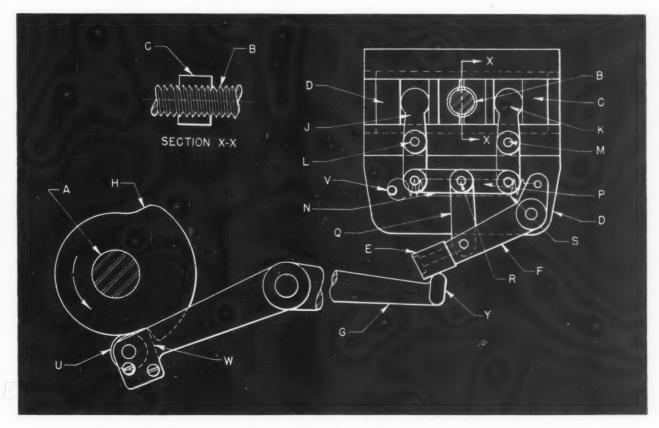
Cam H, Bellcrank G, Rocker Arm F, and a Toggle Joint Provide Intermittent Feed by Periodically Engaging and Disengaging Lead-screw B and Split Nut C and D
